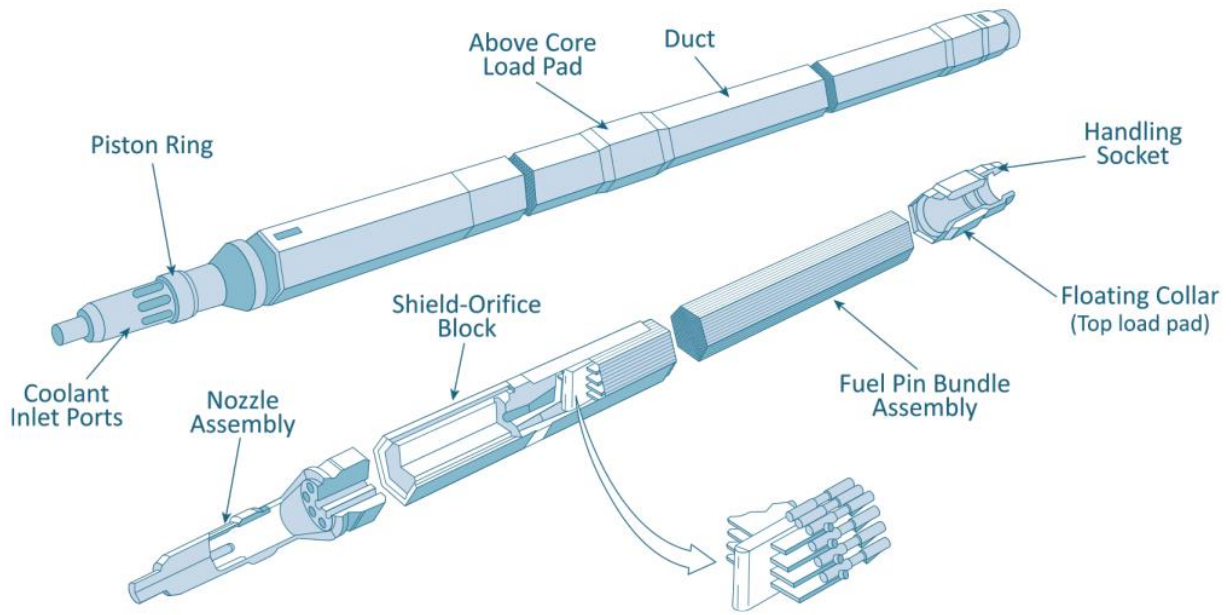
ARC-100 fuel rod and assembly design (ARC, 2023)
